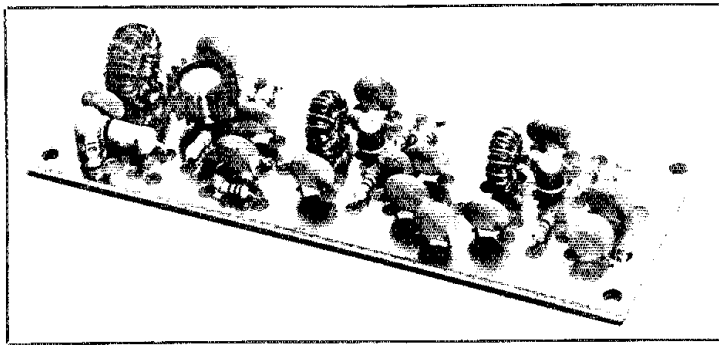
The assembled broadband amplifier. Note that in-line layout is used.
